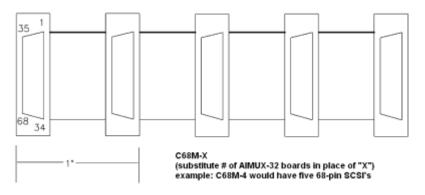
C68M-X Multi-SCSI Cable Drawing
